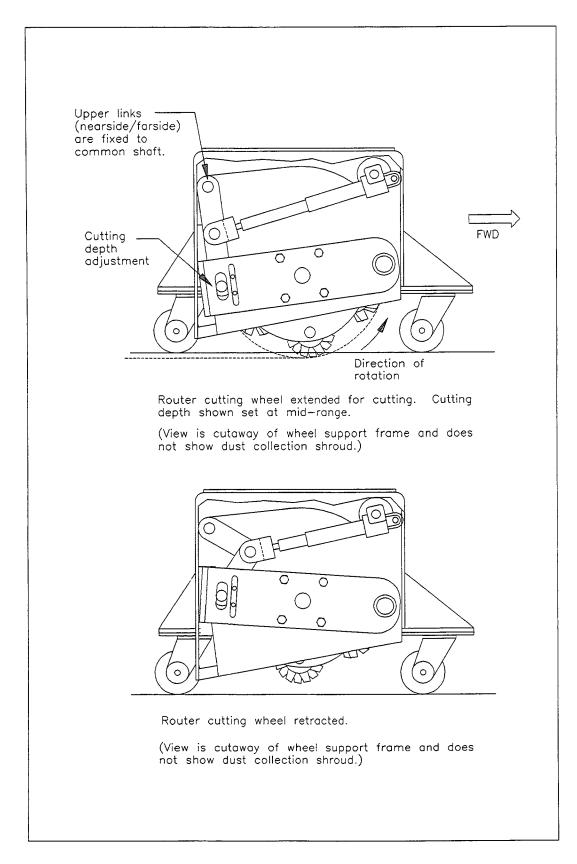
Router Cutting Wheel Extension And Retraction.
